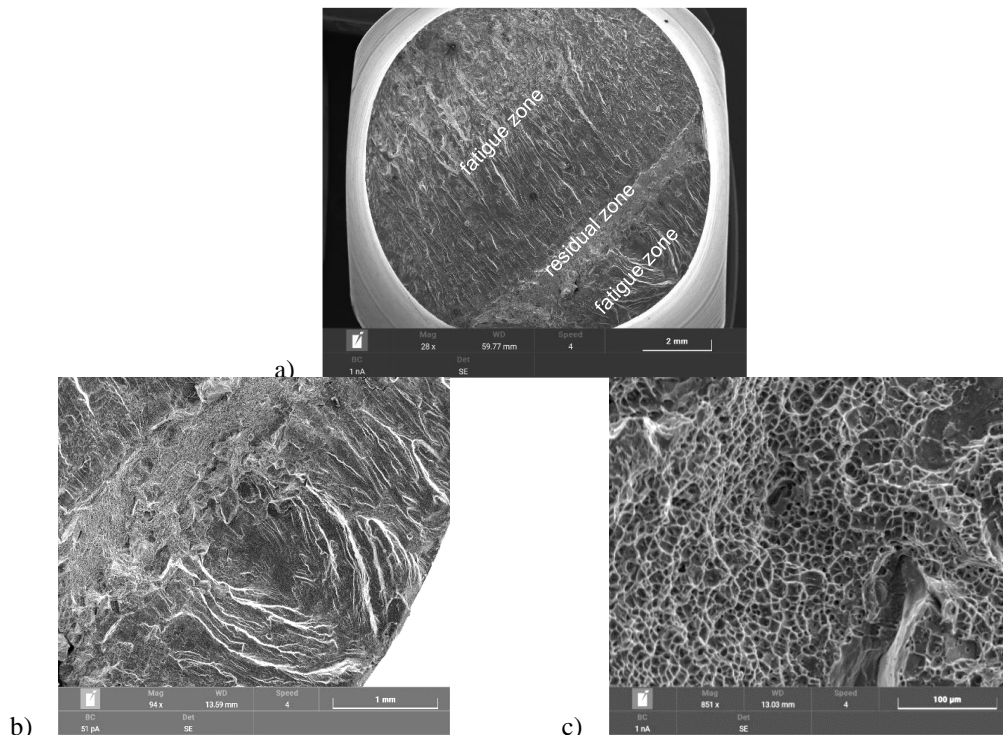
Fatigue fracture of the alloy after T6 treatment caused by bending, a) fracture morphology, b) surface in the area of the fatigue zone, c) surface in the area of the residual zone (specimen 9 - 1 870 187 cycles)
